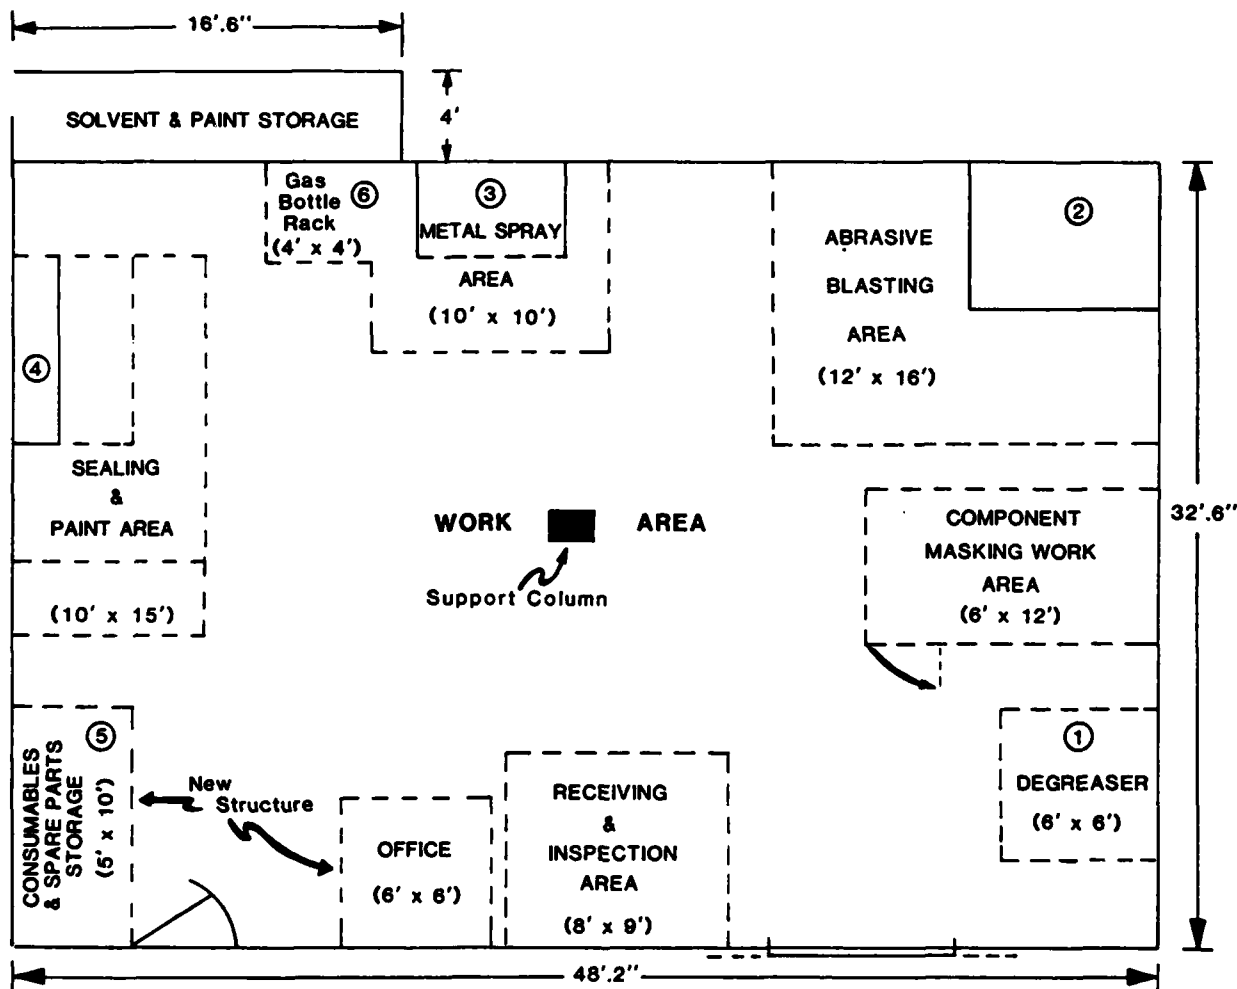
PILOT CC SHOP LAYOUT - BLDG. 20
